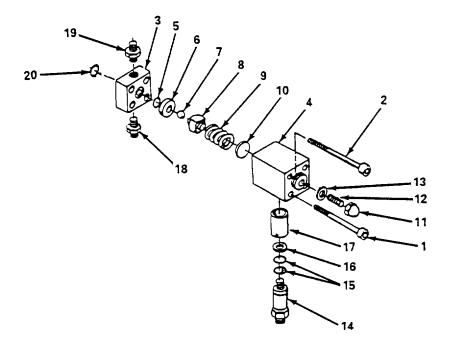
Oil Pressure Regulator Valve and Oil Return Line, Repair.
